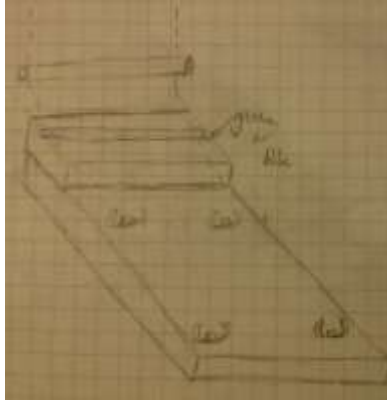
A v-groove would guide the path of a cutting blade.
